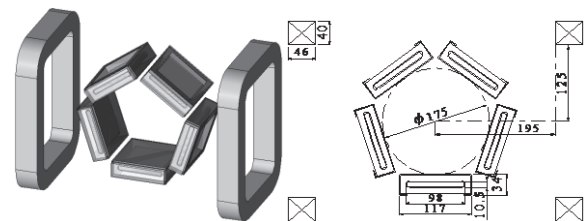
Arrangement of aluminum ingots and HTS coils, and dimension of cross-section.
